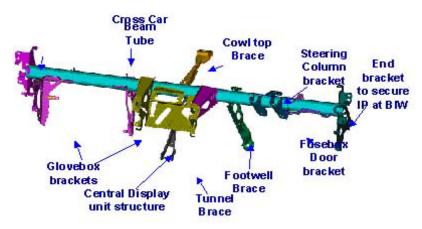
Traditional metal carrier with multiple components and bracketry, including the cross-car beam. This design has been replaced by a single-piece hybrid steel/composite design, which saves mass and costs and simplifies assembly.
